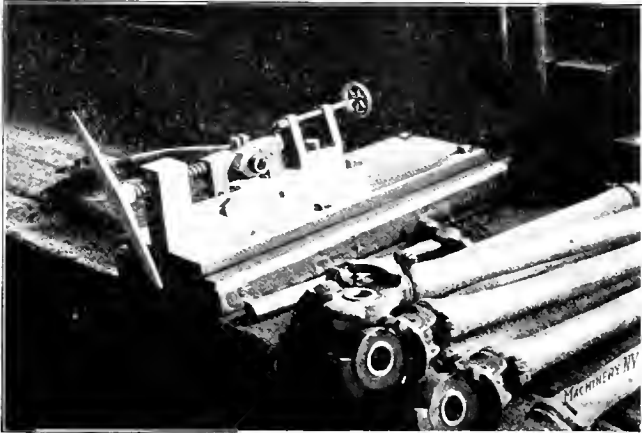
Tool for Compressing Air Hose Clamp Collars
